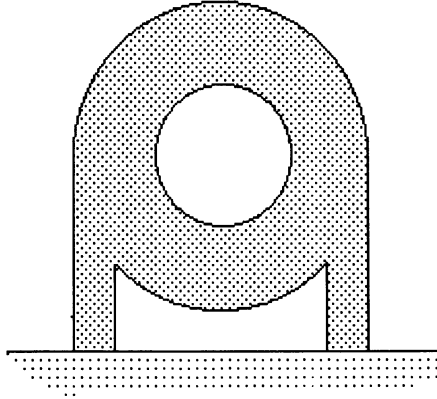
Schematic representation of a bearing with feet, attached to a larger plate.
